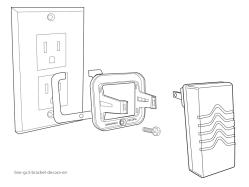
Retaining Wall Brackect—Decora-Style Duplex Receptacle
